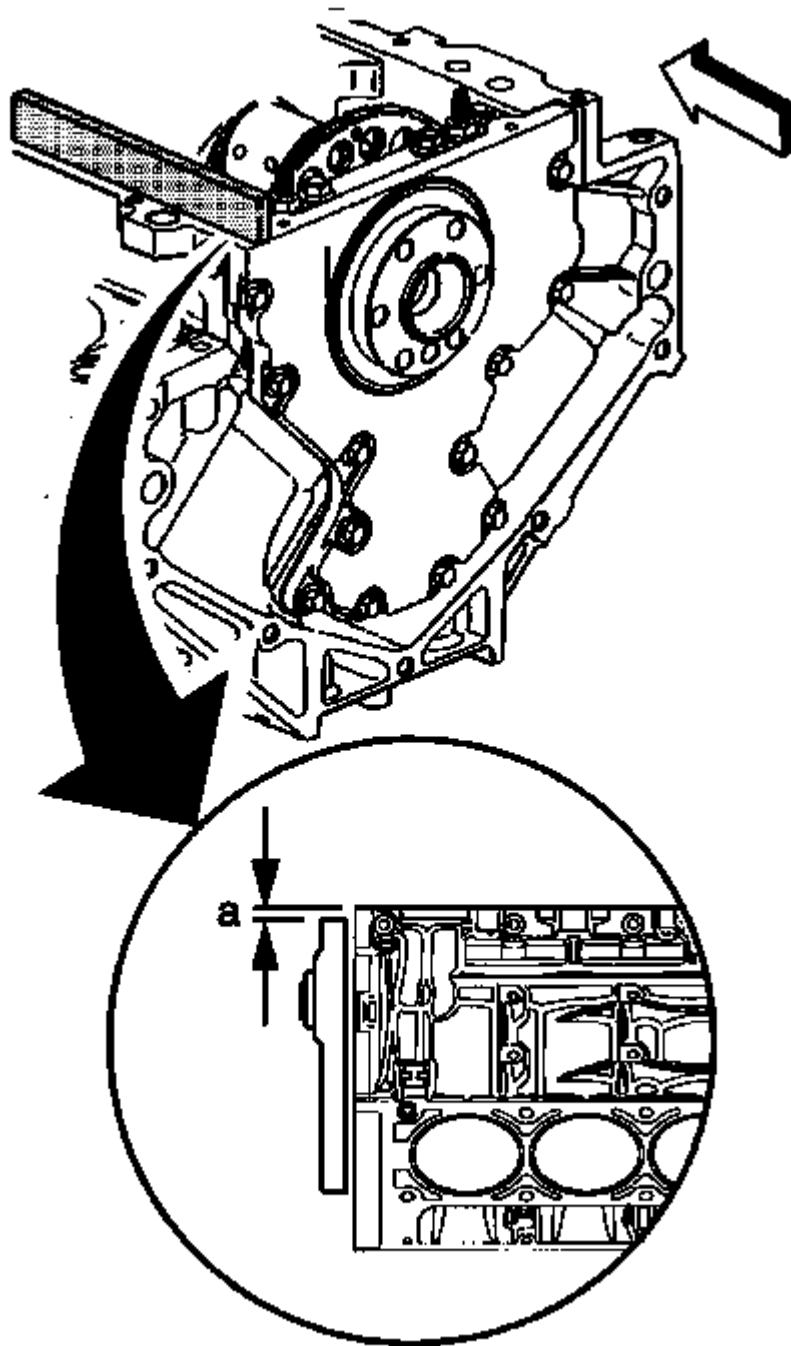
Checking Rear Cover-To-Engine Block Proper Installation Position
